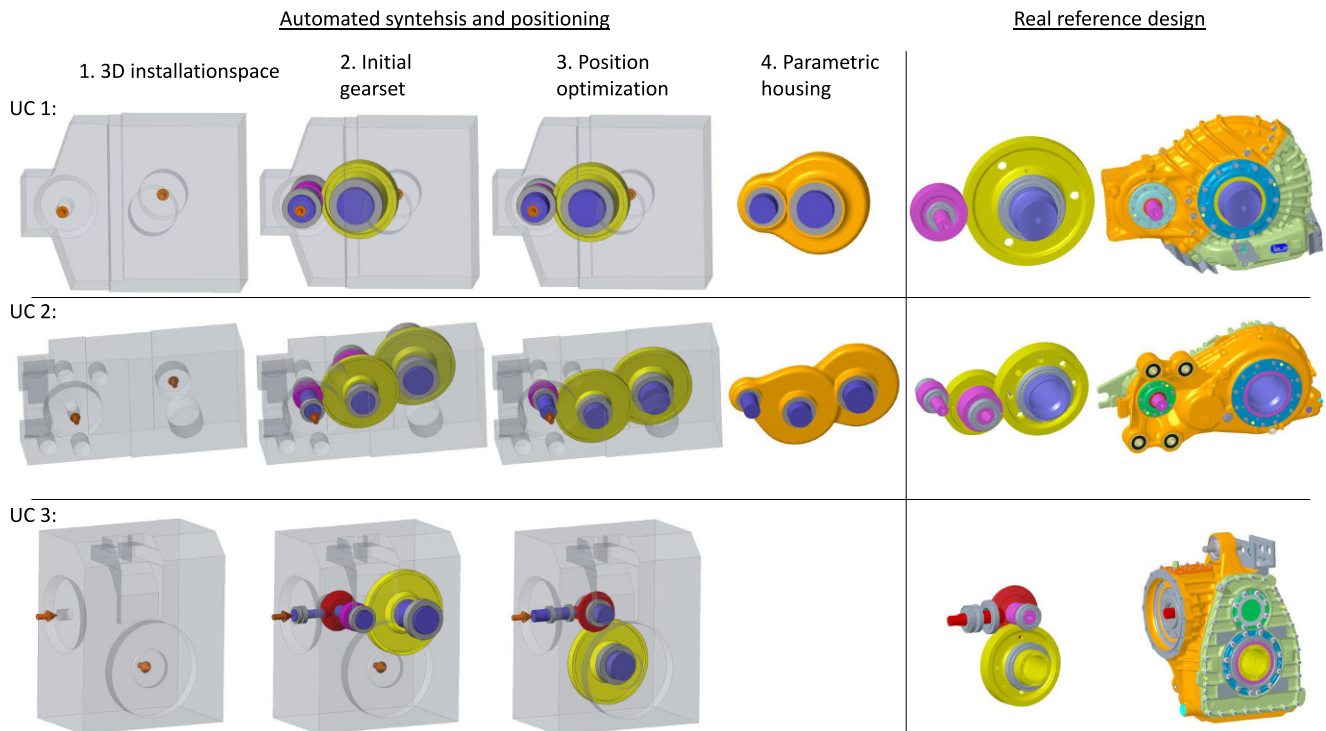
Usecase 1 to 3; From the requirements to the positioned gearset; Bevel gears in *red*; Spur wheel in solid construction in *pink*; Spur gear with waisted bridge and hub in *yellow*; Shaft in *blue*; Bearings in *gray
